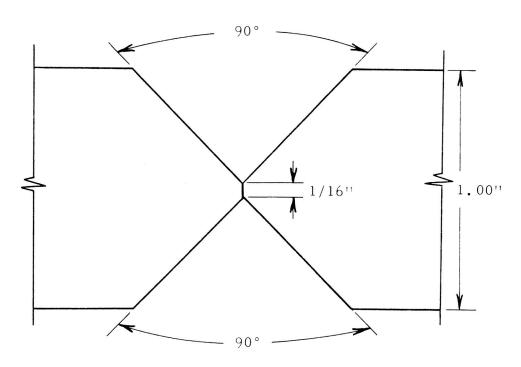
TYPICAL CROSS-SECTION AND JOINT PREPARATION FOR 1.00-INCH MIG WELDMENTS
